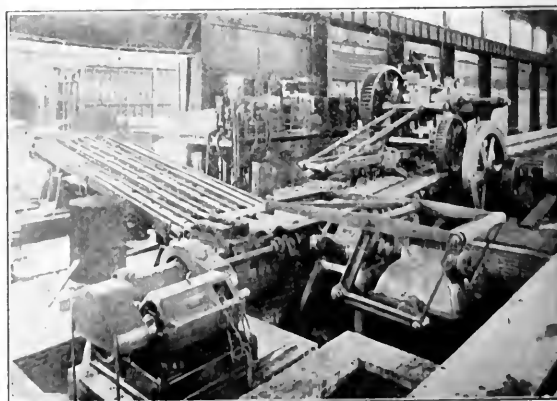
BILLET CONVEYOR AND GRASSHOPPER PUSHER
